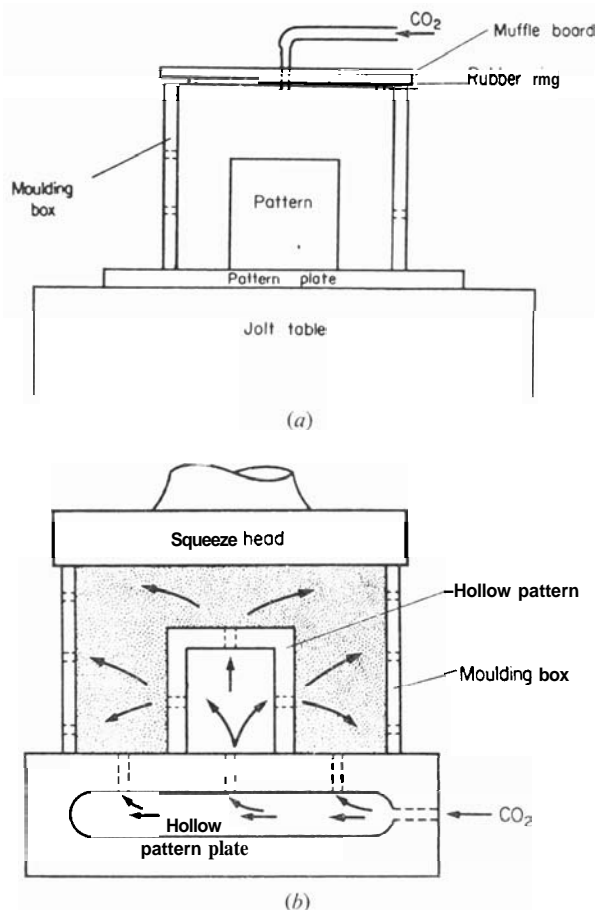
(a) Carbon dioxide gassing of a mould using a sealed muffle board. (b) Carbon dioxide gassing of a mould through a hollow pattern plate (Sarkar⁷).
